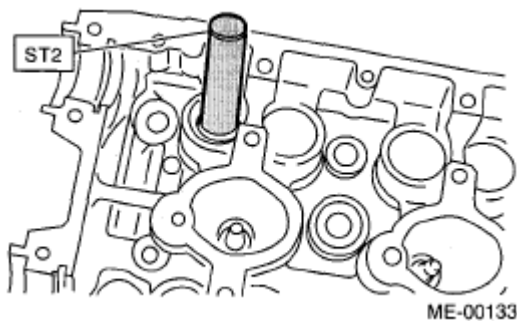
Pressing To Fit Oil Seal On Cylinder Head Using Special Tool
